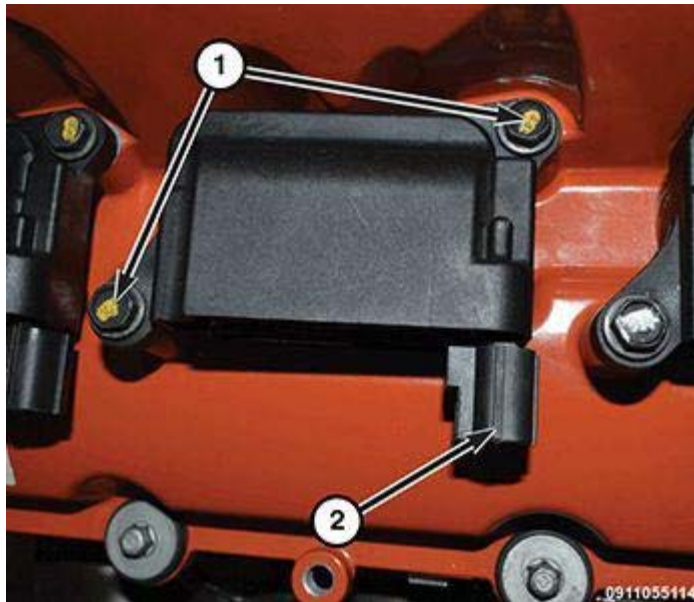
Ignition Coil Wire Harness Connector & Bolts
